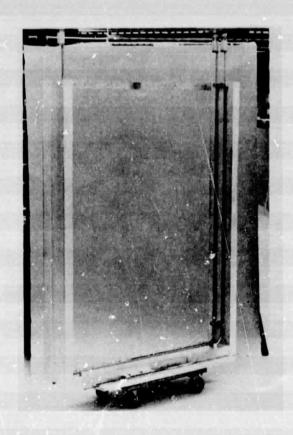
SEP Module Partially Assembled in Soldering Fixture
